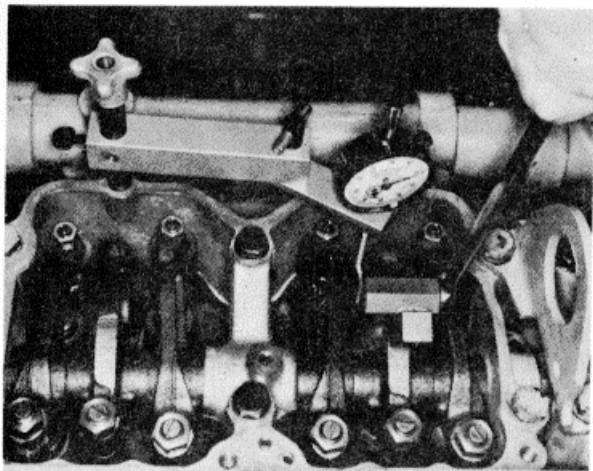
, (N114237) Bottoming injector plunger in cup
